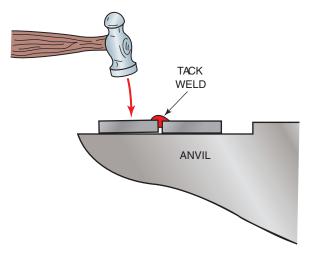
After the plates are tack welded together, they can be forced into alignment by striking them with a hammer.
